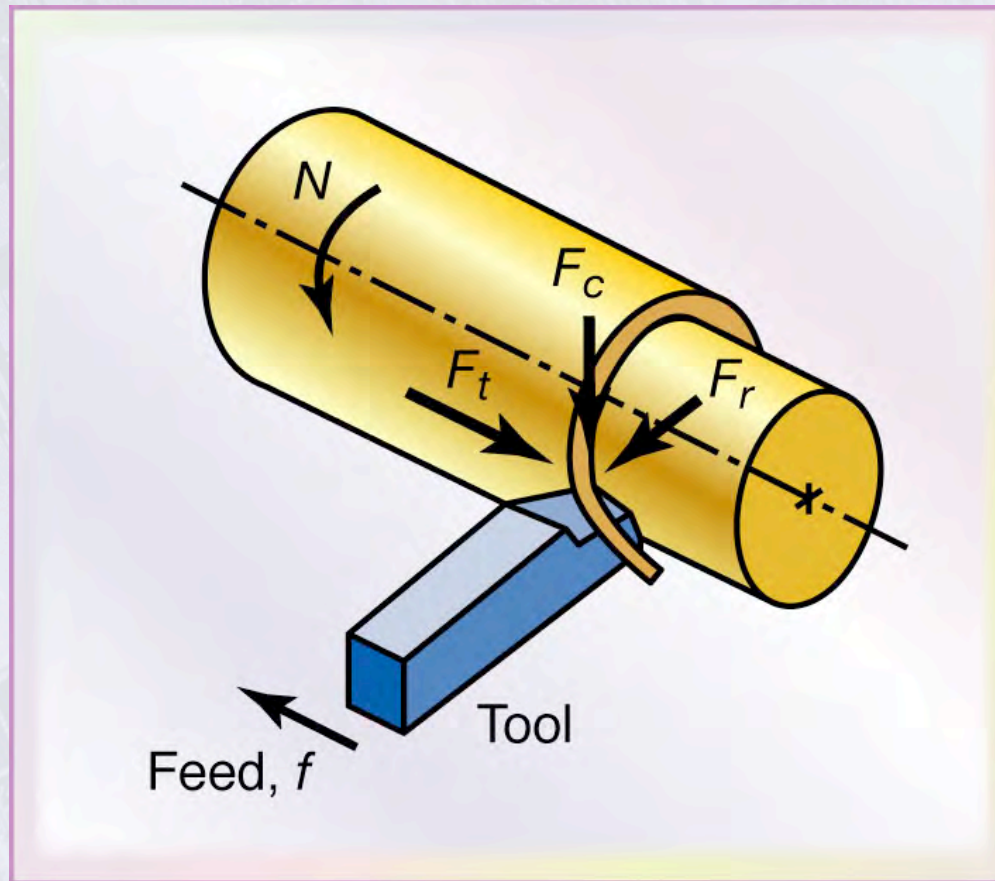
Forces acting on a cutting tool in turning, F_c is the cutting force, F_t is the thrust or feed force (in the direction of feed), and F_r is the radial force that tends to push the tool away from the workpiece being machined.
